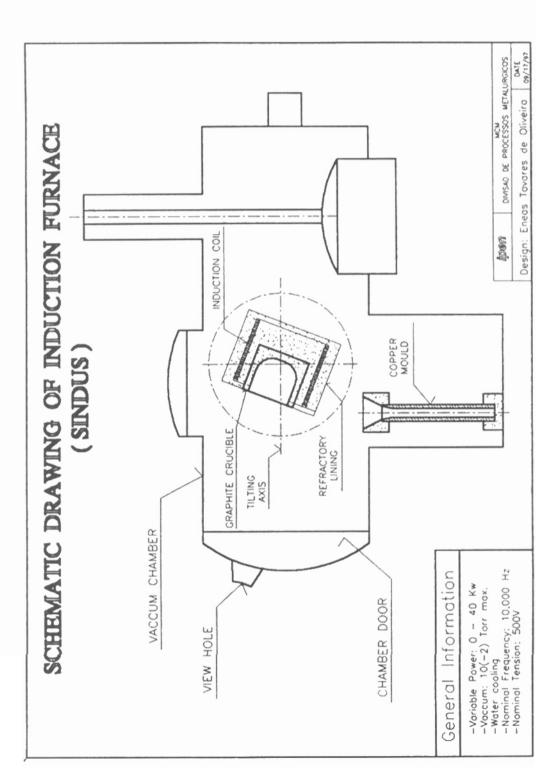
Schematic drawing of Vacuum Induction Furnace (SINDUS) to fabricate the intermetallic U₃Si,
